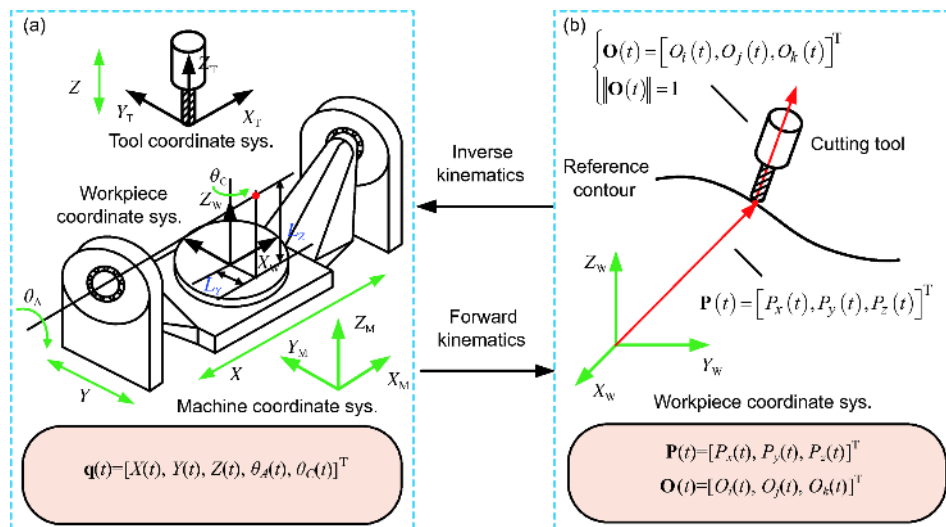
(Color online) Kinematics for TRT type five-axis machine tool. (a) Kinematic configuration; (b) tool path generated in the workpiece coordinate system.
